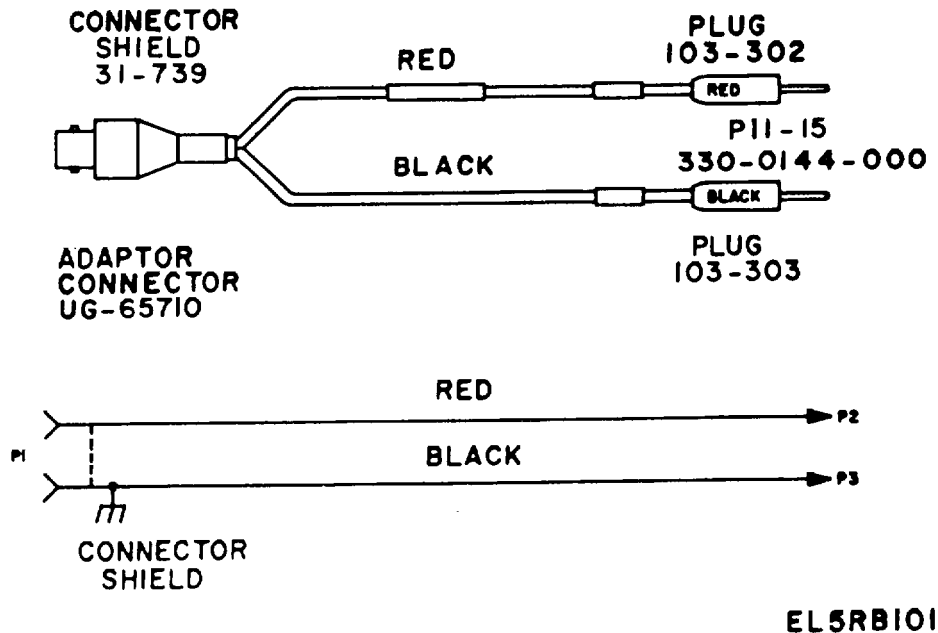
Test Lead PEN-SK-004, Assembly And Schematic Diagram.
